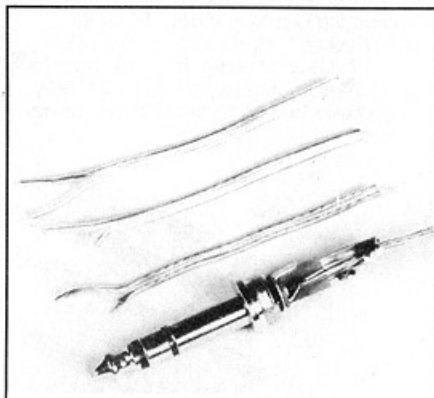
Installing a phone plug to zip cord is easy: Split the cord conductors; cut the sleeve conductor to match the plug terminal spacing; strip and tin; solder; crimp the strain relief; and screw on the shell. (To avoid that sinking "I've been had" feeling, be sure to slide the shell on the cord the right way *before* soldering the cord conductors to the plug!)
